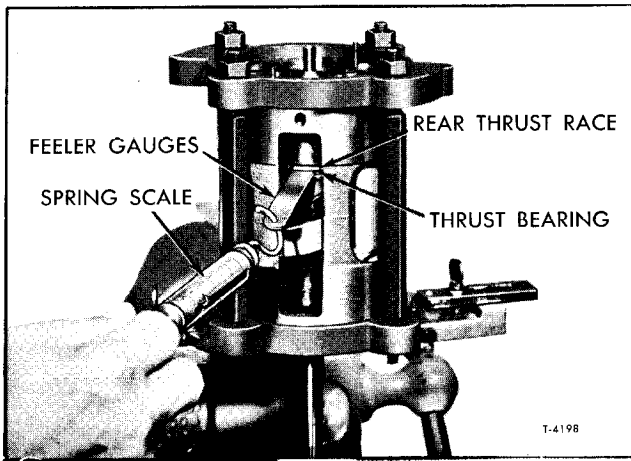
Checking Clearance Between Rear Thrust Bearing and Outer Thrust Race
